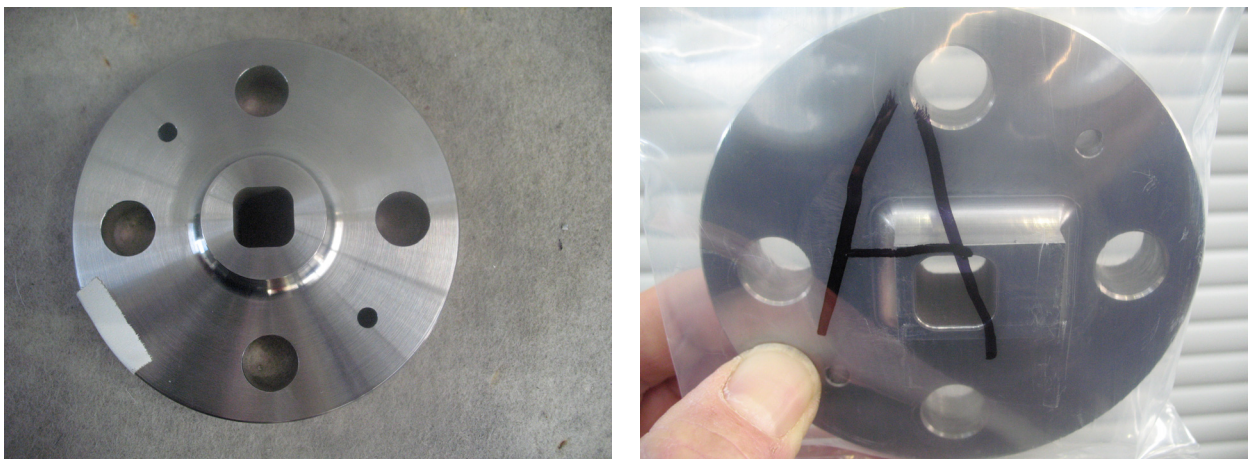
Flanges to be welded on side (inlet/outlet) section (left) and on heated section (right).
